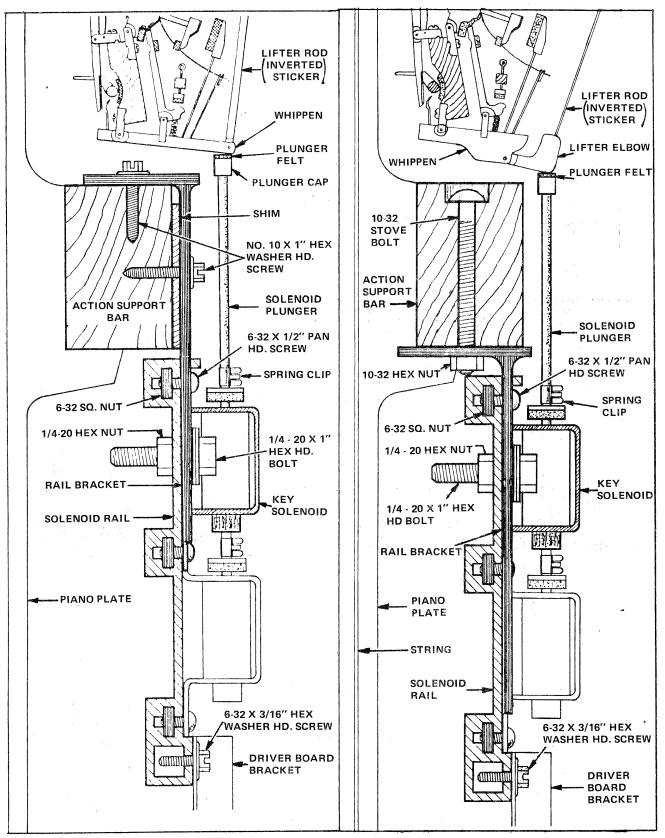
C Cross-section view of Rail installation in a piano with a Drop Action (bracket mounted on top of the Support Bar).
